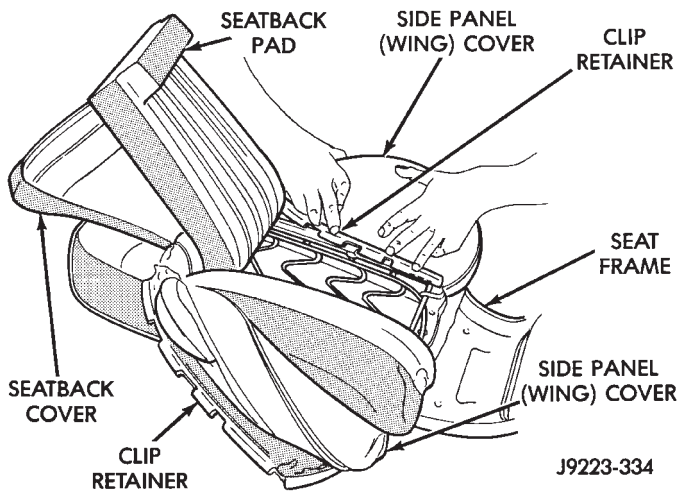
Side Panel (Wing) Covers Inside-Out—Wingback Seat
